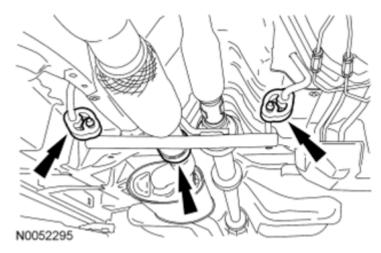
Locating Exhaust Flexible Pipe Clamp Courtesy of FORD MOTOR CO.
